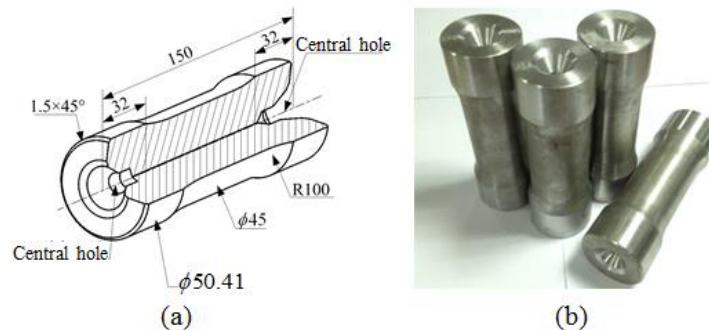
The shape and sizes of the blank of spline shaft: (a) shape and sizes and (b) real picture of blank shaft
